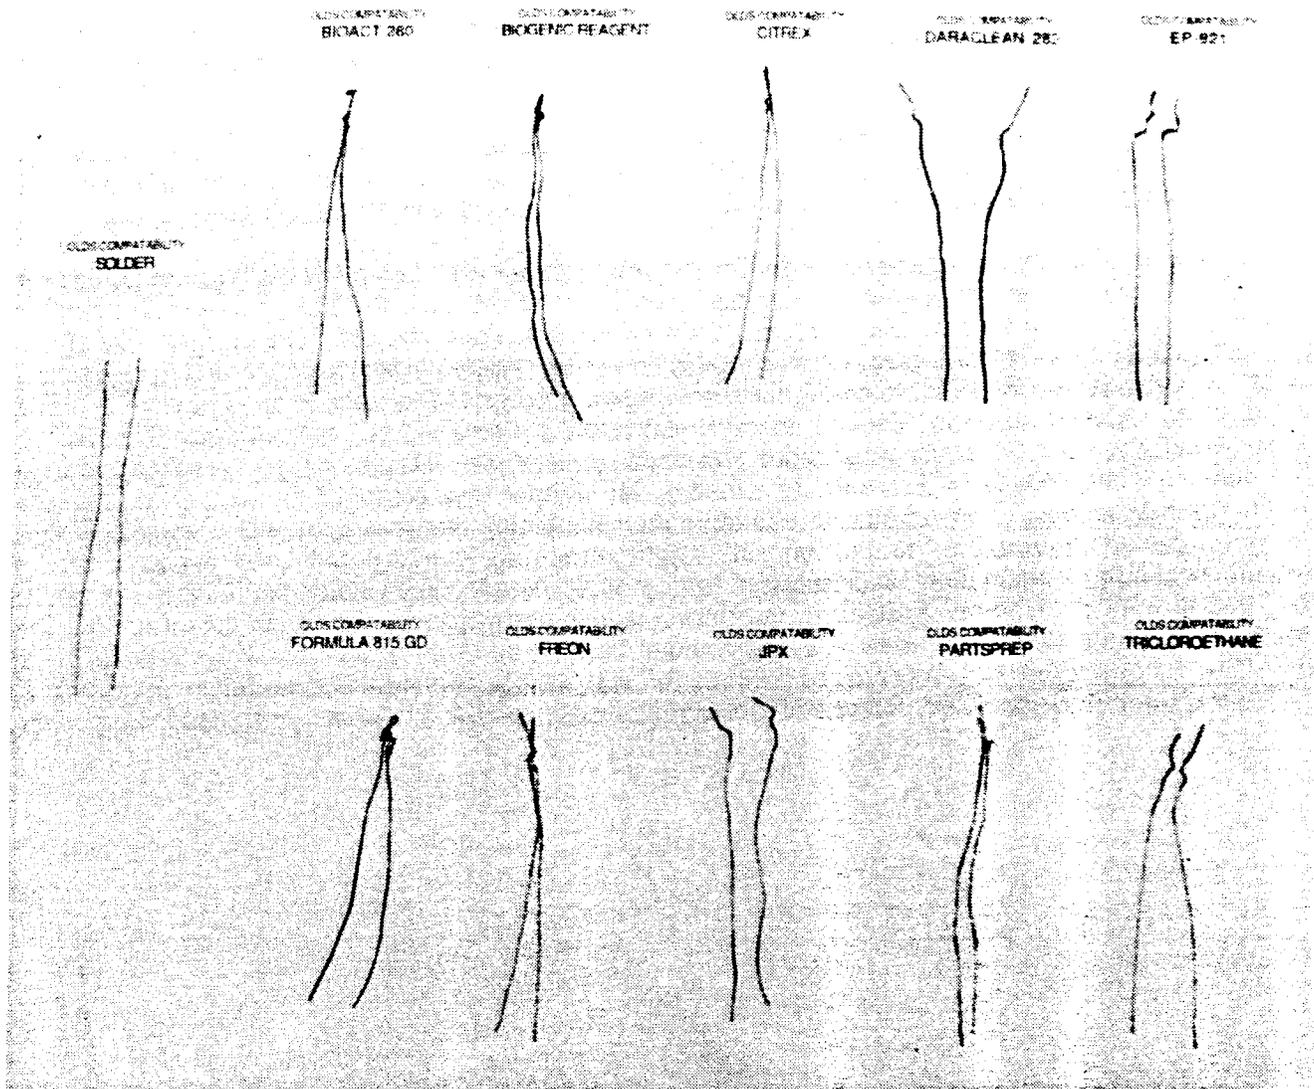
SOLDER AFTER SIX WEEKS EXPOSURE TO CLEANERS
